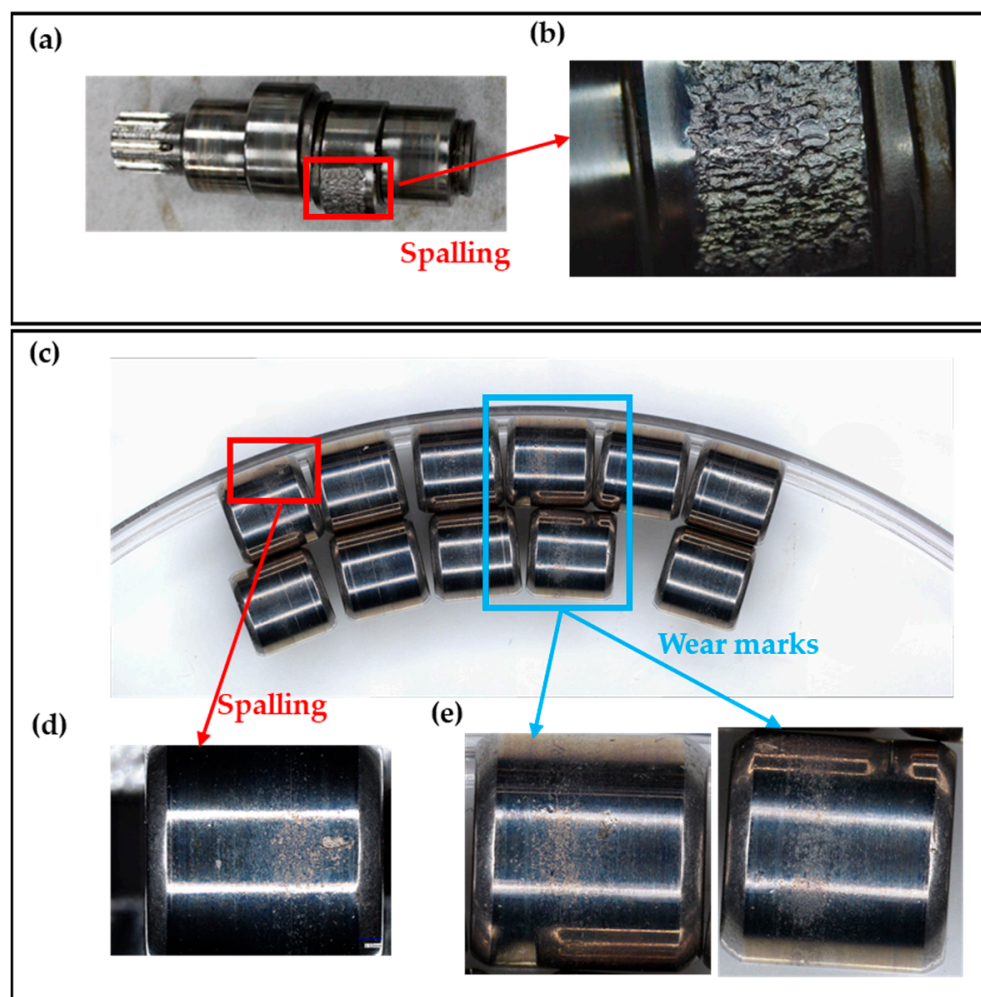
Damage on RV reducer. (a) spalling on crankshaft; (b) enlarged view of spalling on crankshaft; (c) wear and spalling on bearing rollers; (d) enlarged view of spalling on roller; (e) enlarged view of wear on rollers.
